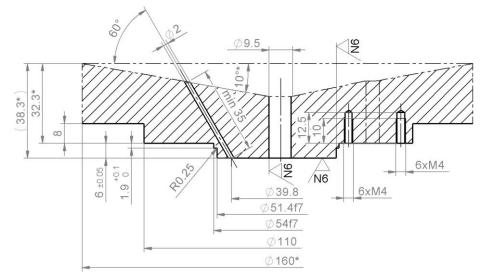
Part of "Pump tank mixer flange – design guideline" (for example PTM-1)
